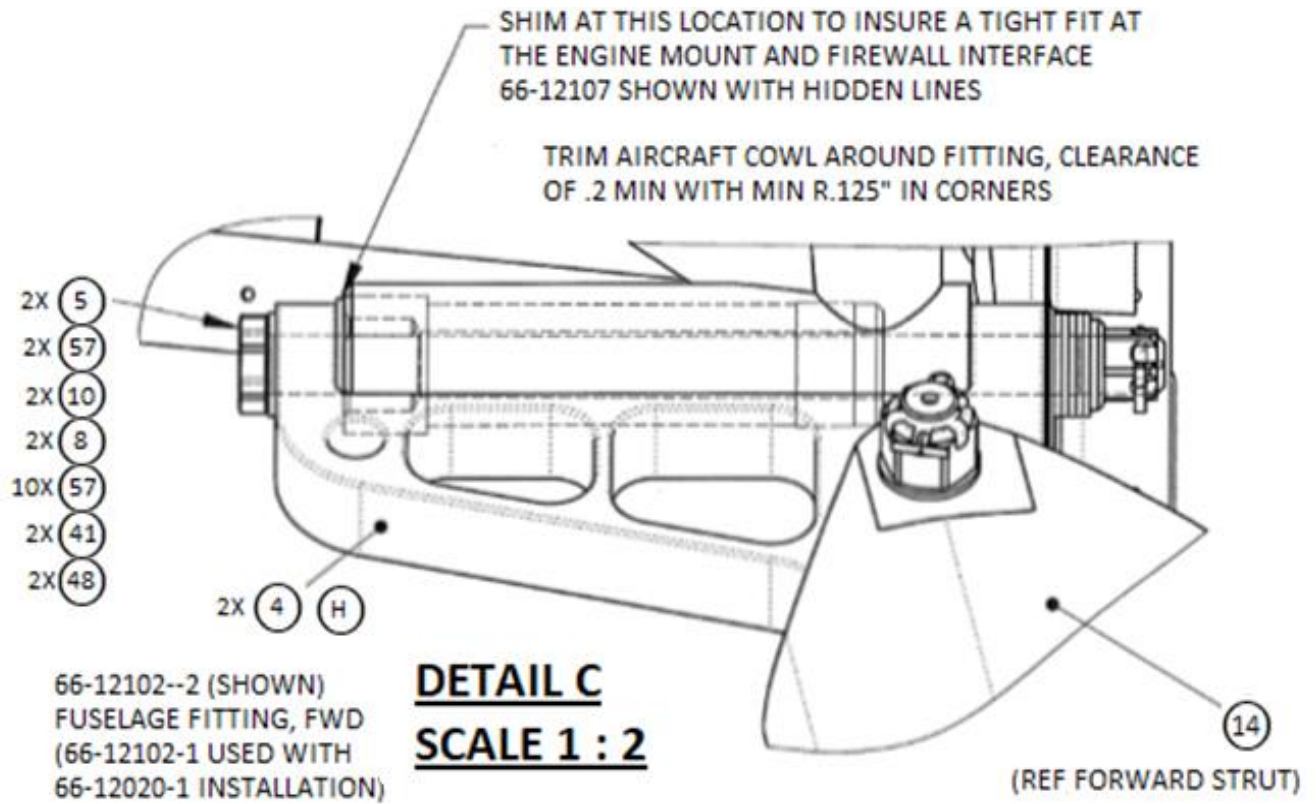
66-12102-2 Fuselage Fitting Detail Installation
